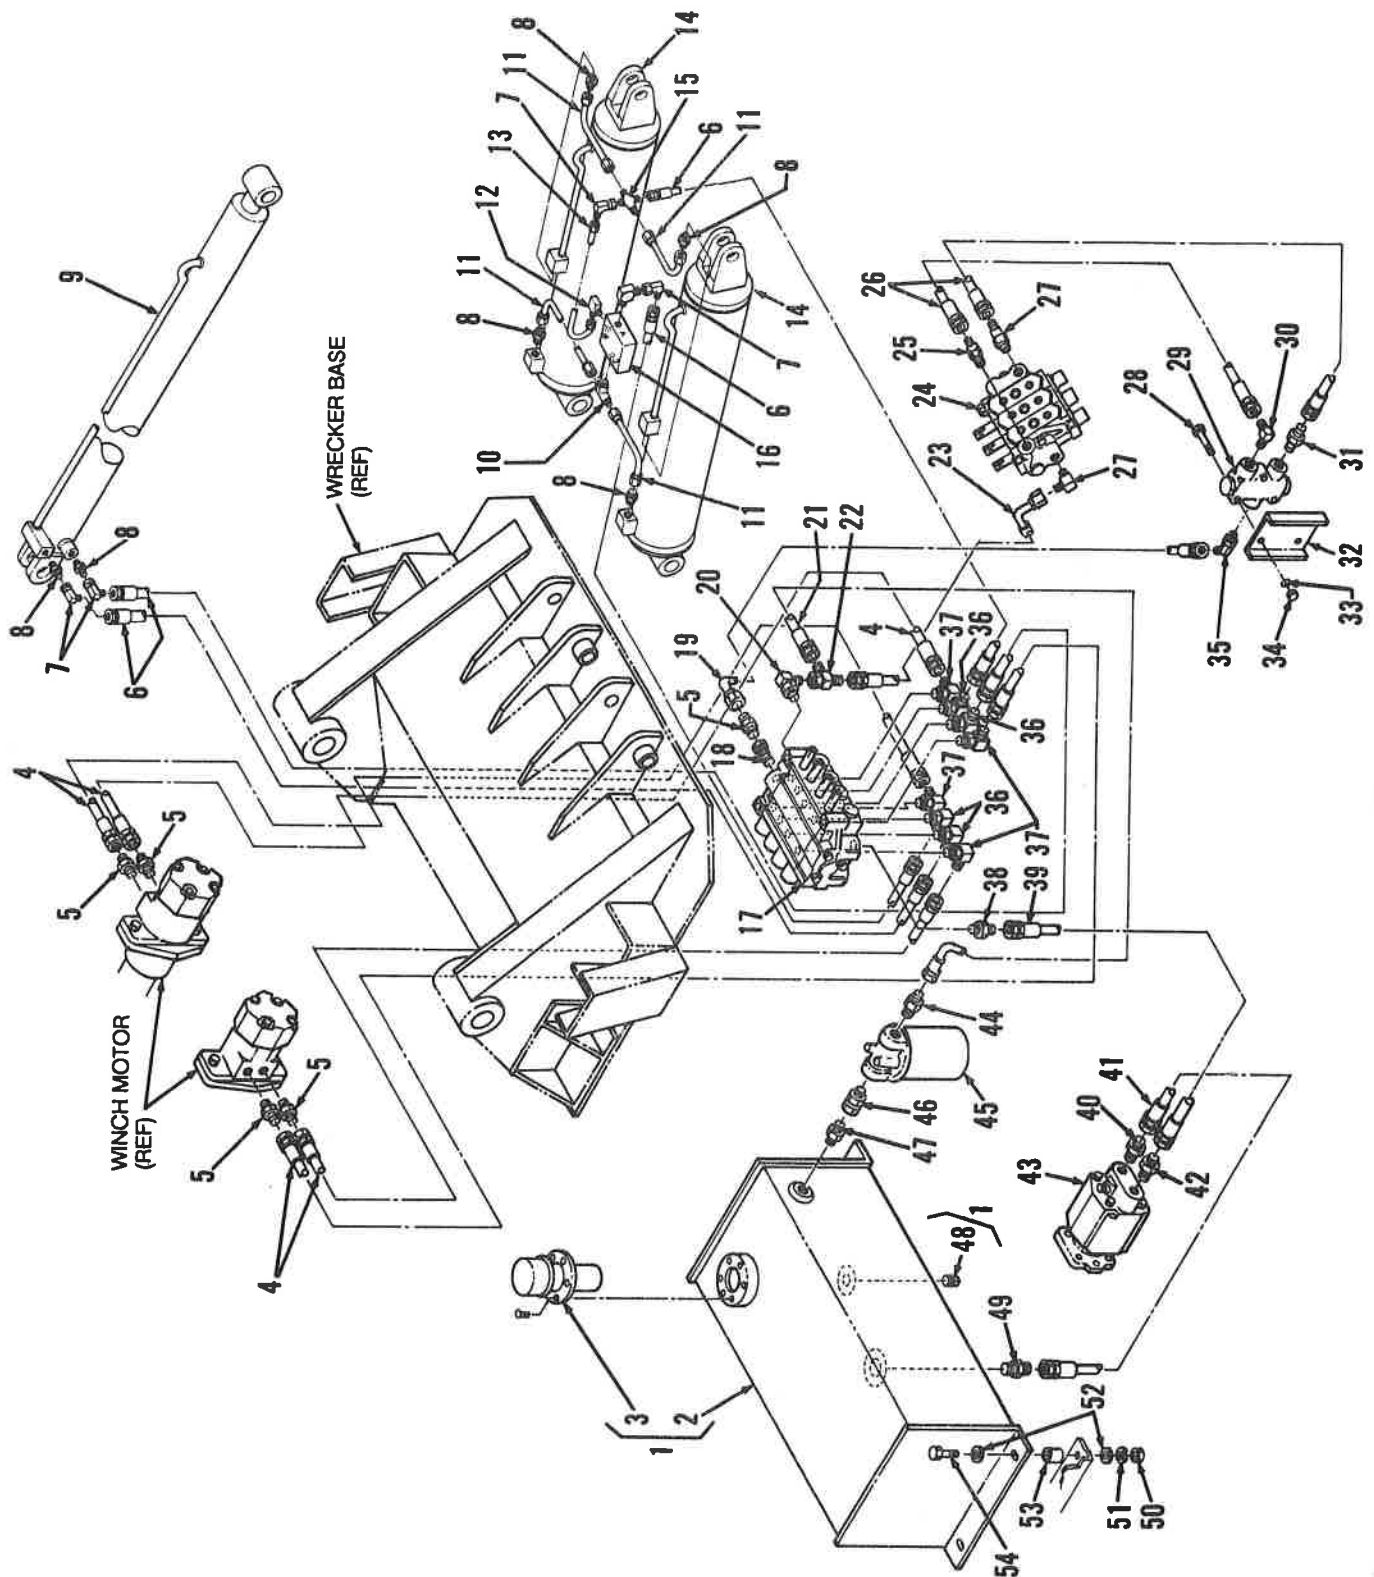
3210 Wrecker Hydraulic Parts with Related DFT 200 Wheel Lift Control Valve.
